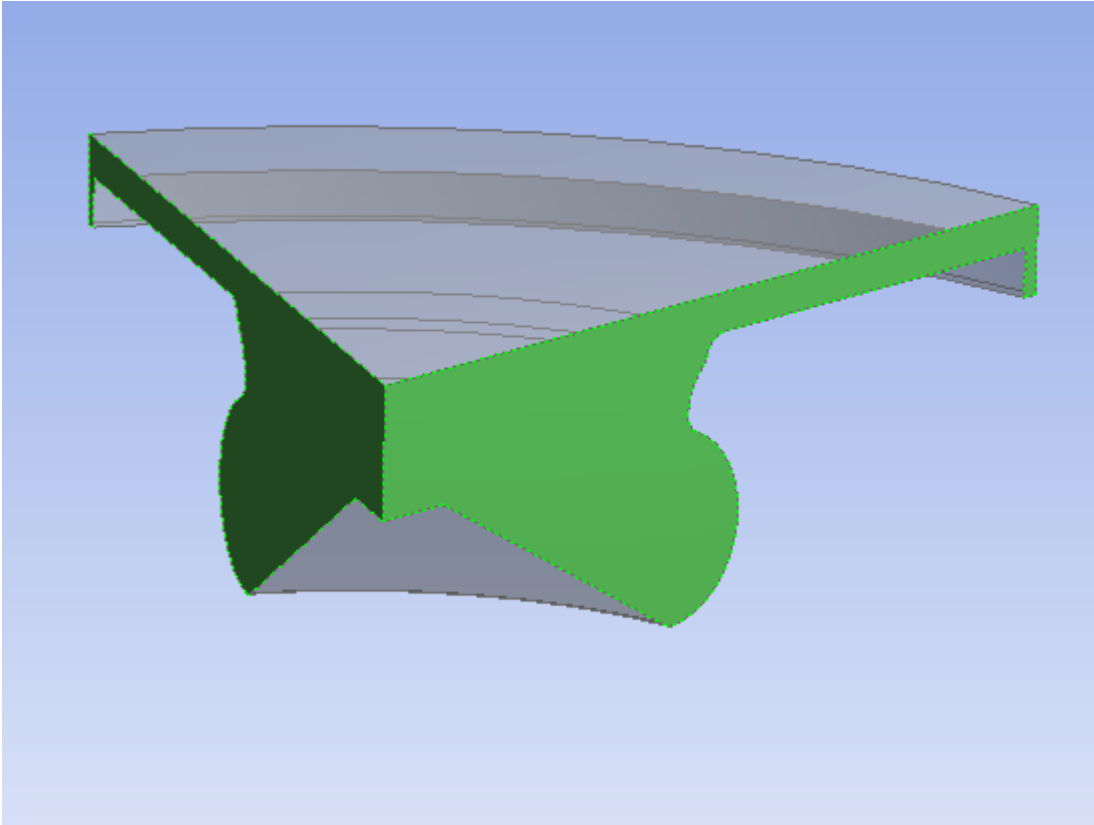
Cylinder Face Selection for a Sector Geometry
